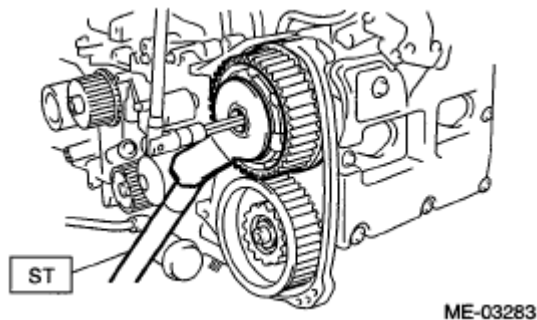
Removing/Installing Cam Sprocket Using ST 499977500
